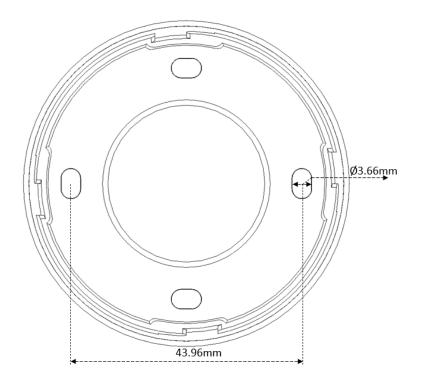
Modbus Gas and TrueVOC Sensor Mounting Holes – Flush Mount
